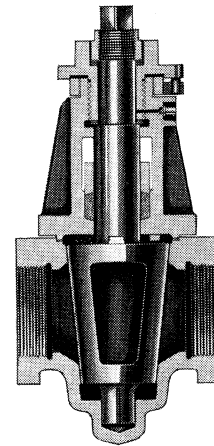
MICHIGAN VALVE & FOUNDRY CO., SCREW LIFT PLUG VALVE
